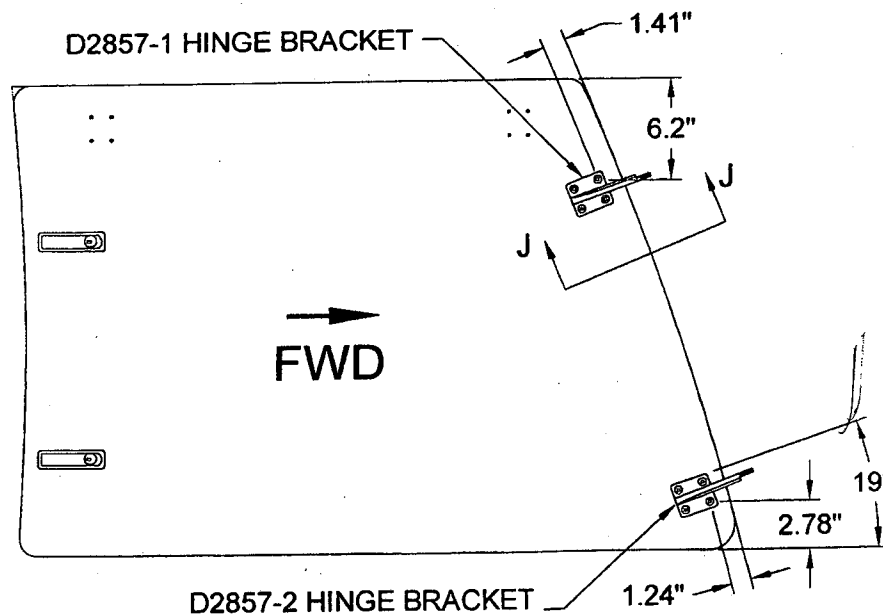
(b) – HINGE BRACKET POSITION ON RH D3186-2 SPACEPOD™ DOOR
